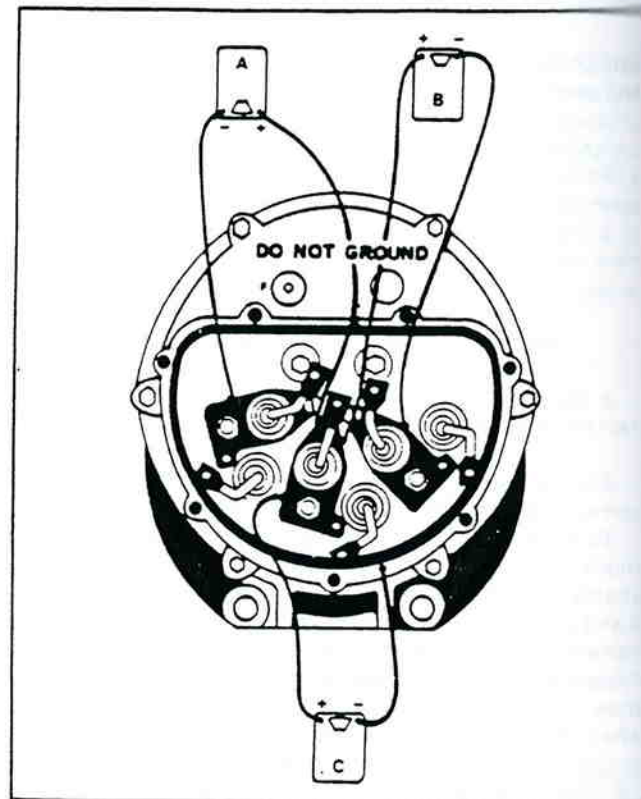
Checking Stator Windings for Opens and Grounds.
